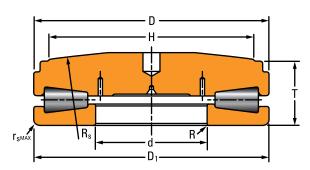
Type TTHDSX thrust tapered roller bearing assembly.
